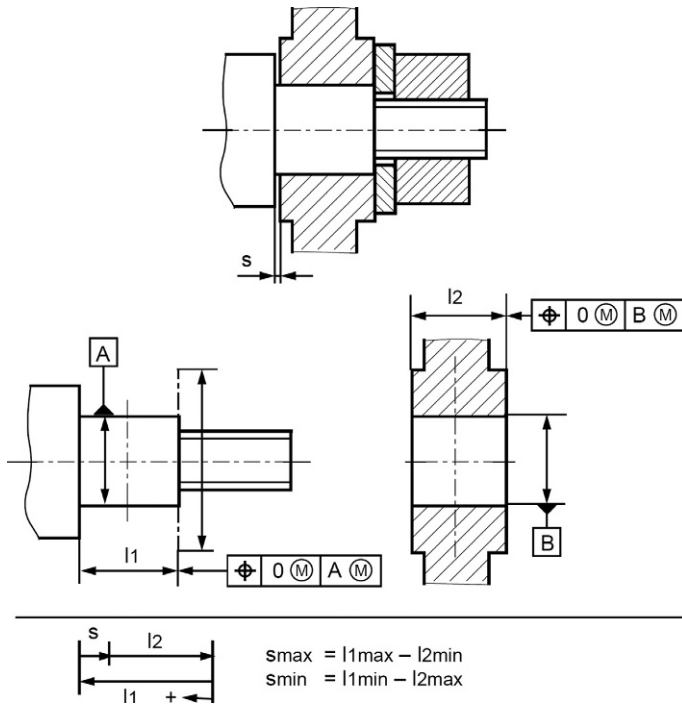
Appropriate tolerancing with enlarged zone
